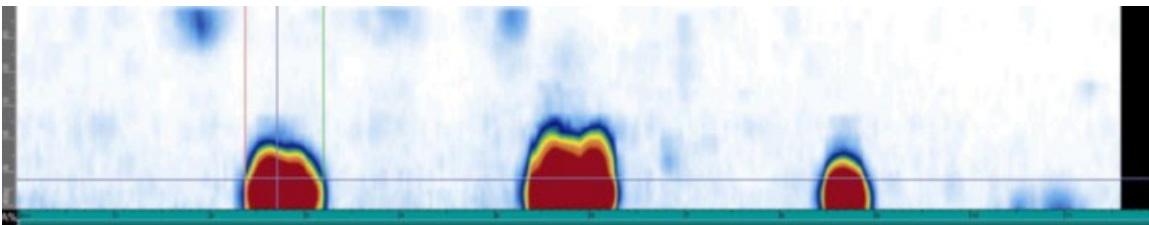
Length measurement of the Flaw D in TTCI-2 MG butt weld test panel
